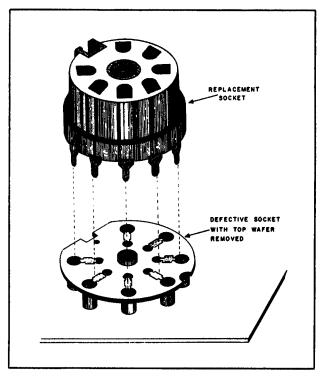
Repair without removal of defective socket by insertion of printed-circuit socket.
